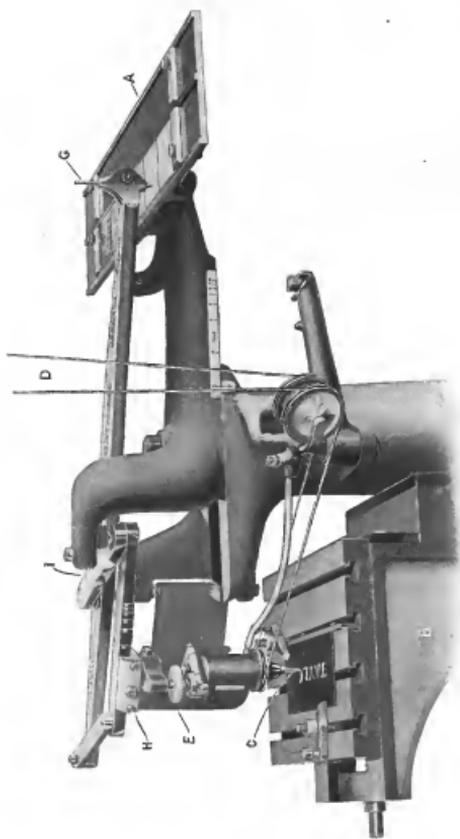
Engraving machine; Taylor, Taylor & Hobson.
